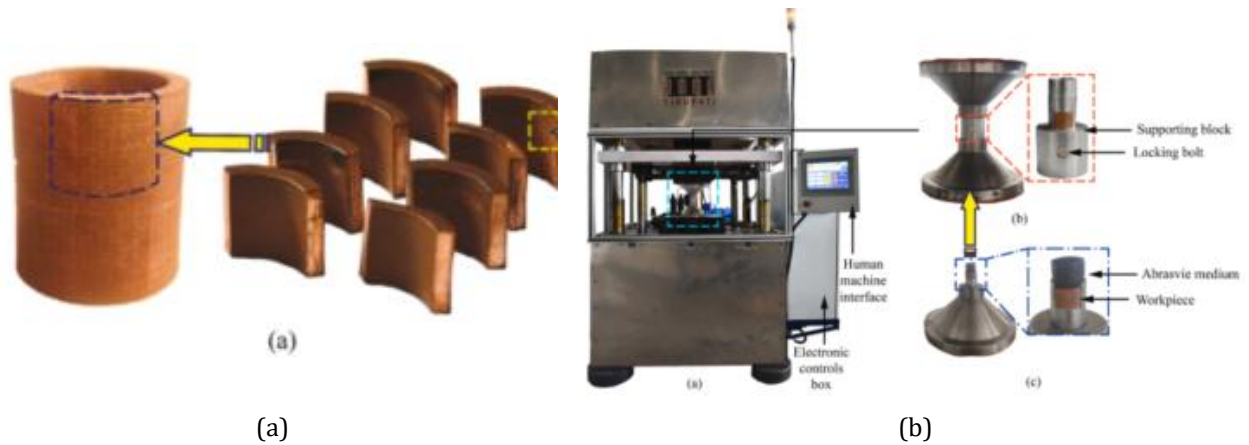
(a) Workpiece (b) AFF setup, fixture, and abrasive medium [69].
